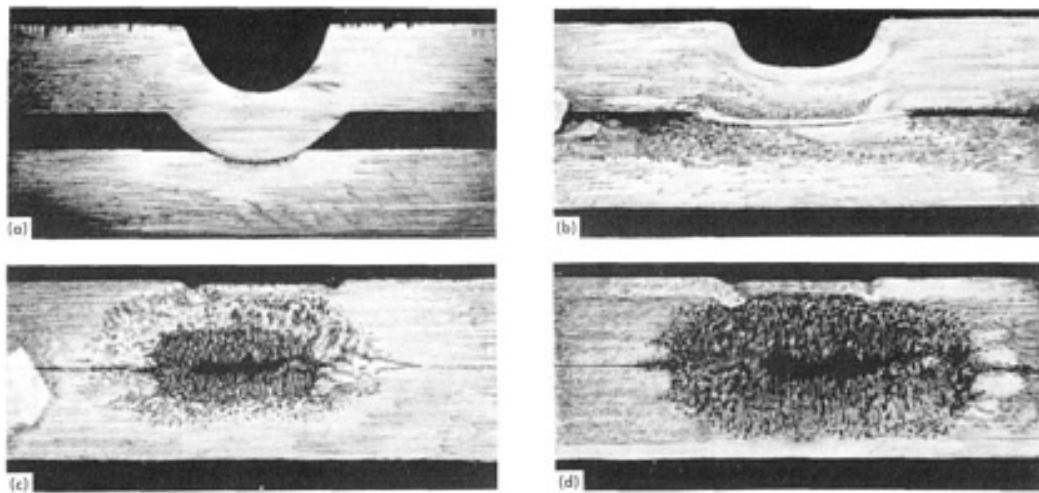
FORMATION OF A WELD NUGGET DURING PROJECTION WELDING OF AN EMBOSSED SPHERICAL PROJECTION. SEE TEXT FOR EXPLANATION.
